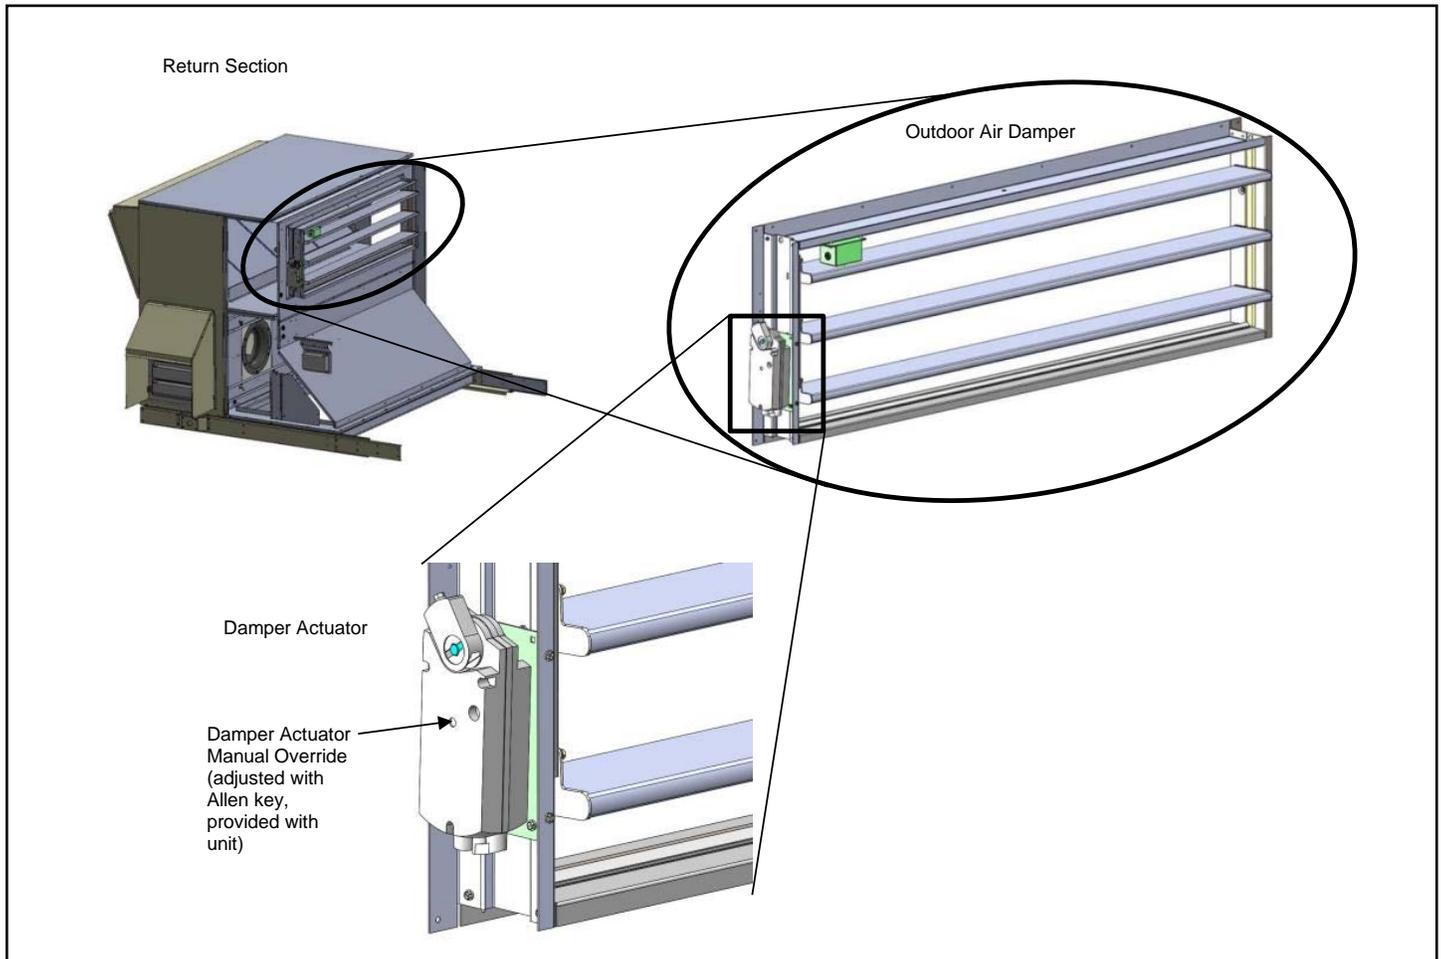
Intake Hood Damper Adjustment (0% Outside Air)
